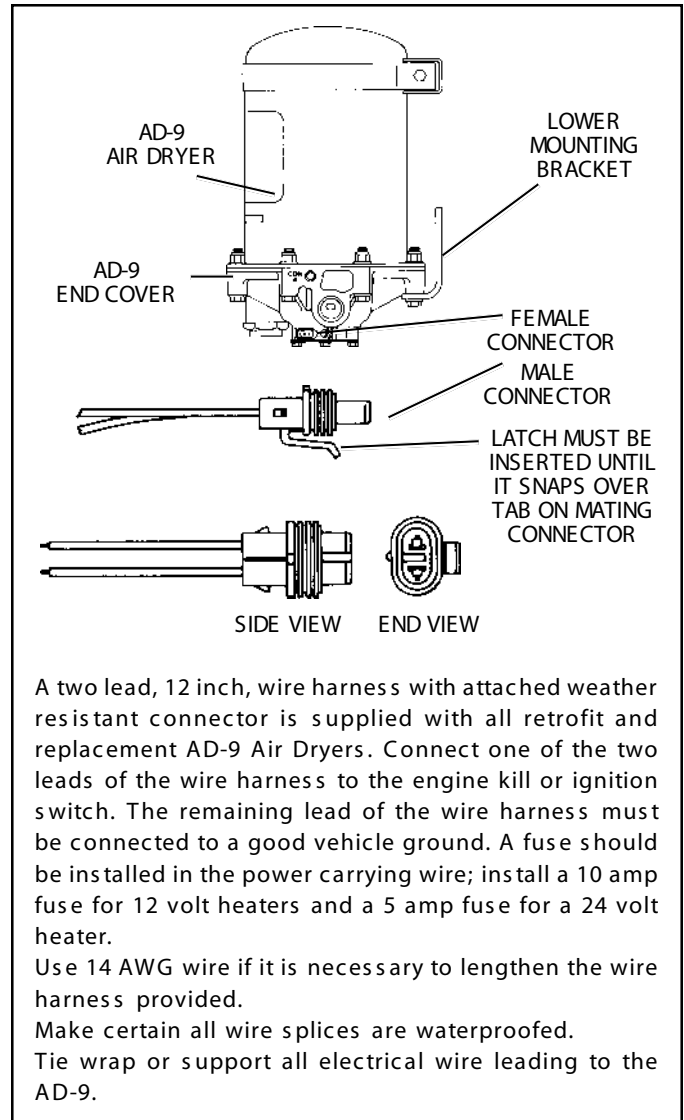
HEATER AND THERMOSTAT CONNECTOR
